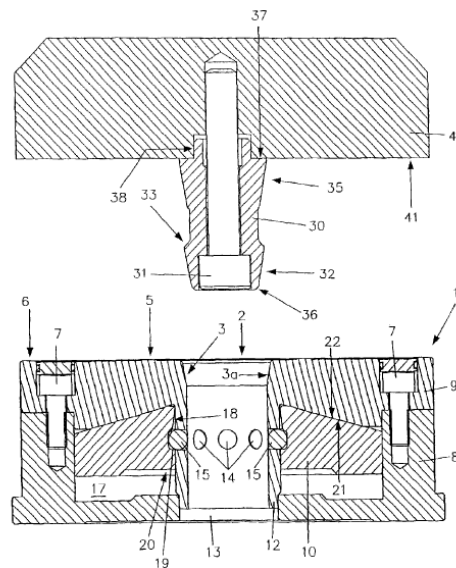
Sectional view of the clamping chuck and of the work piece carrier.
